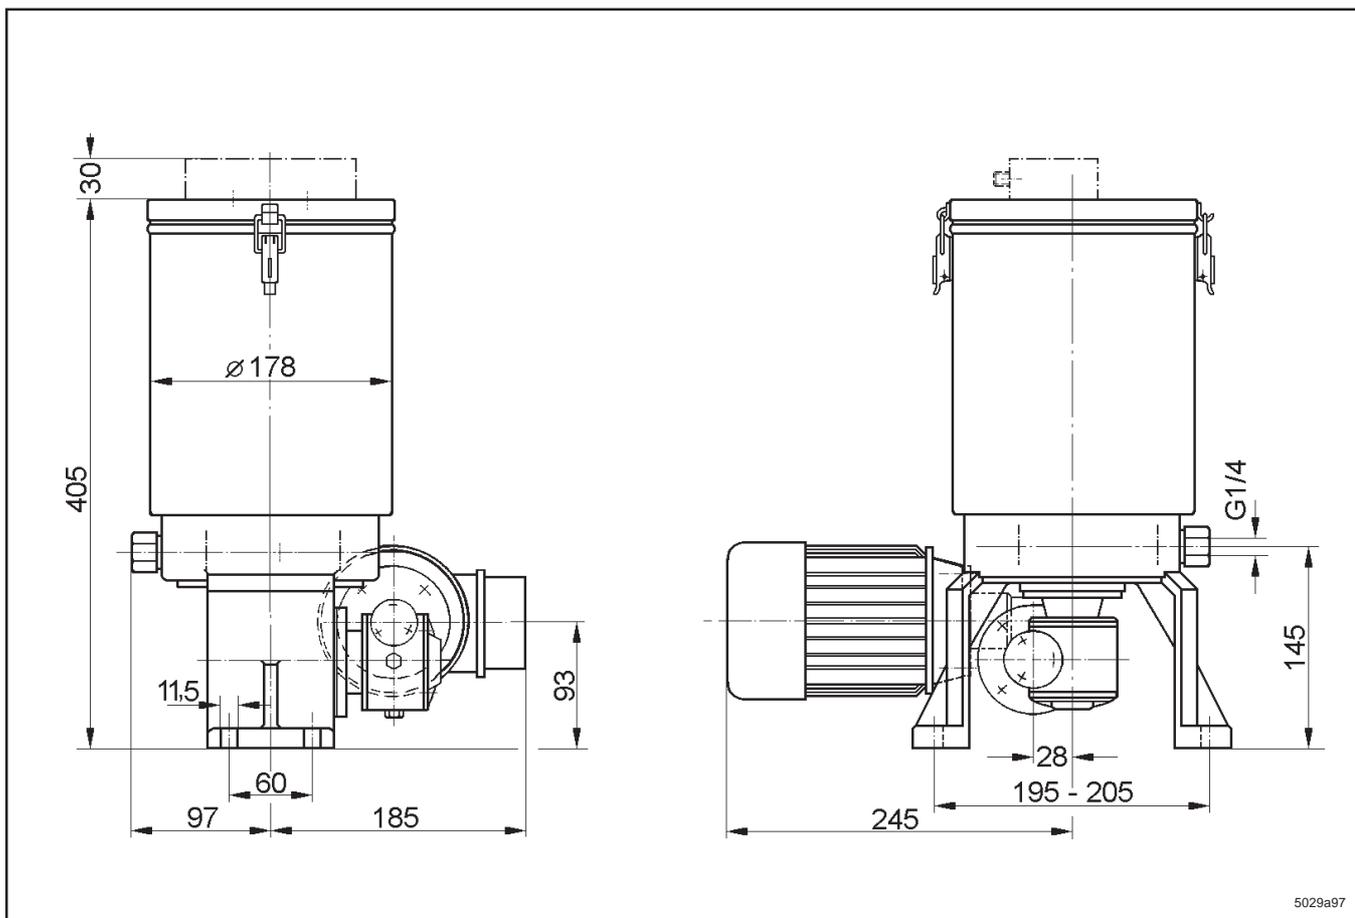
Dimensioned drawing of pump P 205, two-stage gear, 4/8 l plastic reservoir, free shaft end
